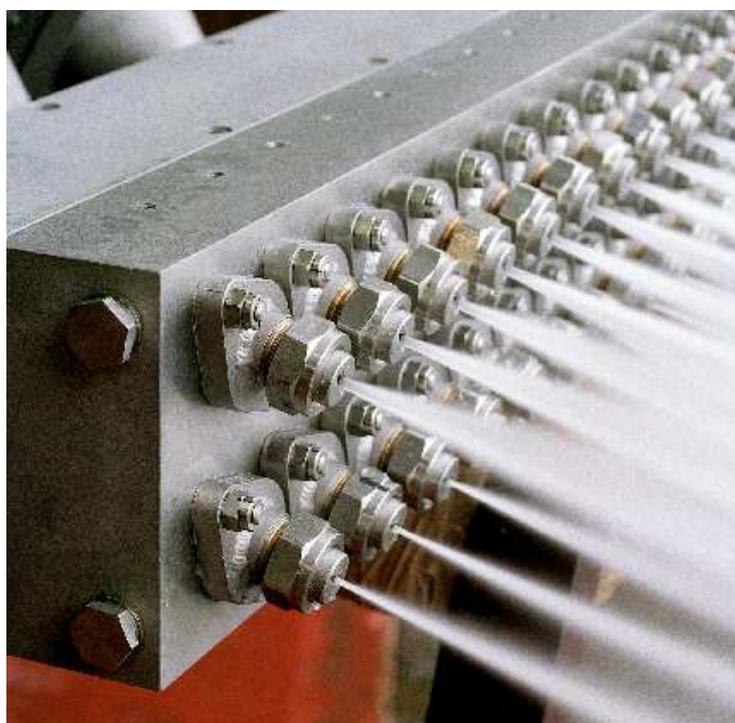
Hot rolling mill coolant sprays (Courtesy of Lechler Ltd.)
